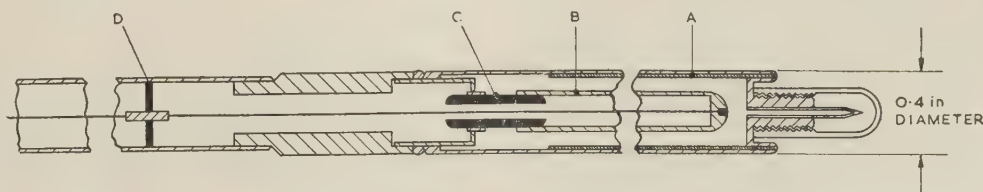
Coaxial-tube fission counter with ceramic/metal insulator support and seal.
